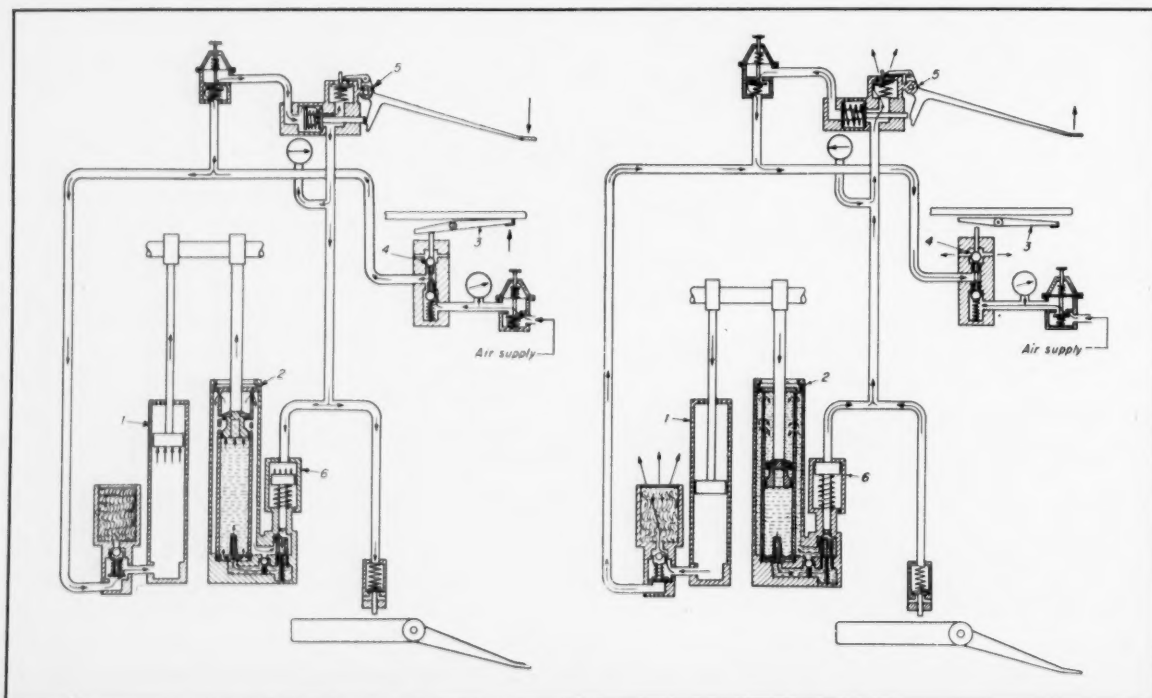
(Left) Press closed, working pressure applied to garment. (Right) Press head opening, air exhausting from air cylinder with head-valve control of air
